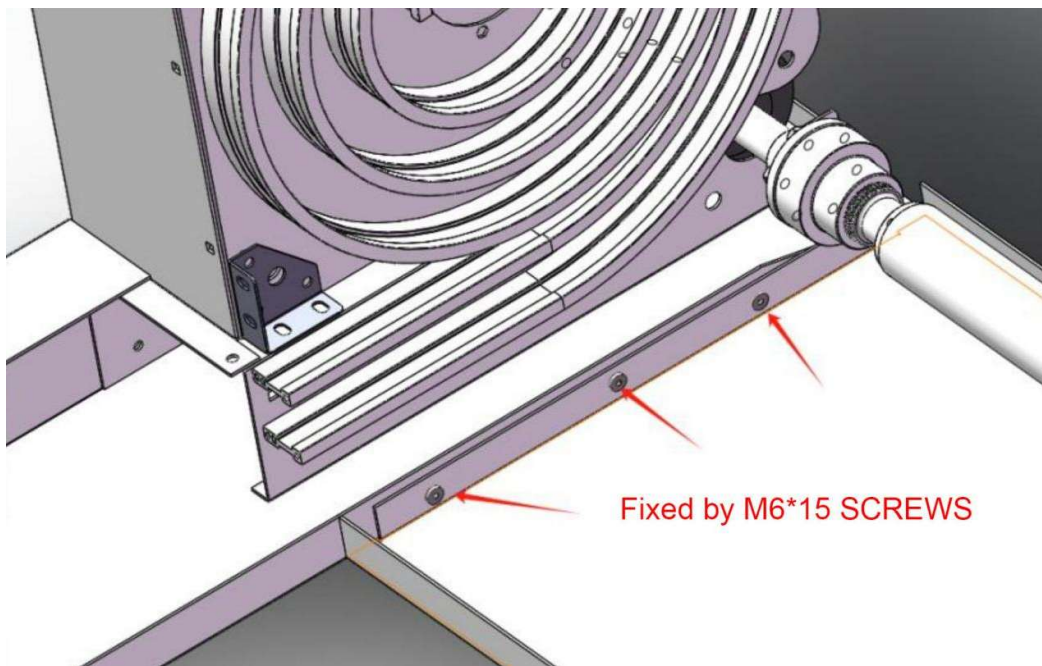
(Secure with hexagonal stainless steel flat head bolts M6*15)
